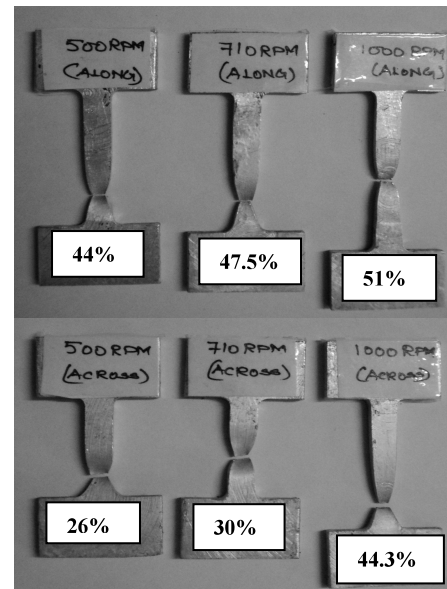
Friction Stir Welding Superplastic Tensile Test coupons are shown after Stretching (Elongation) the FSW zone (along and across the weld zone).
